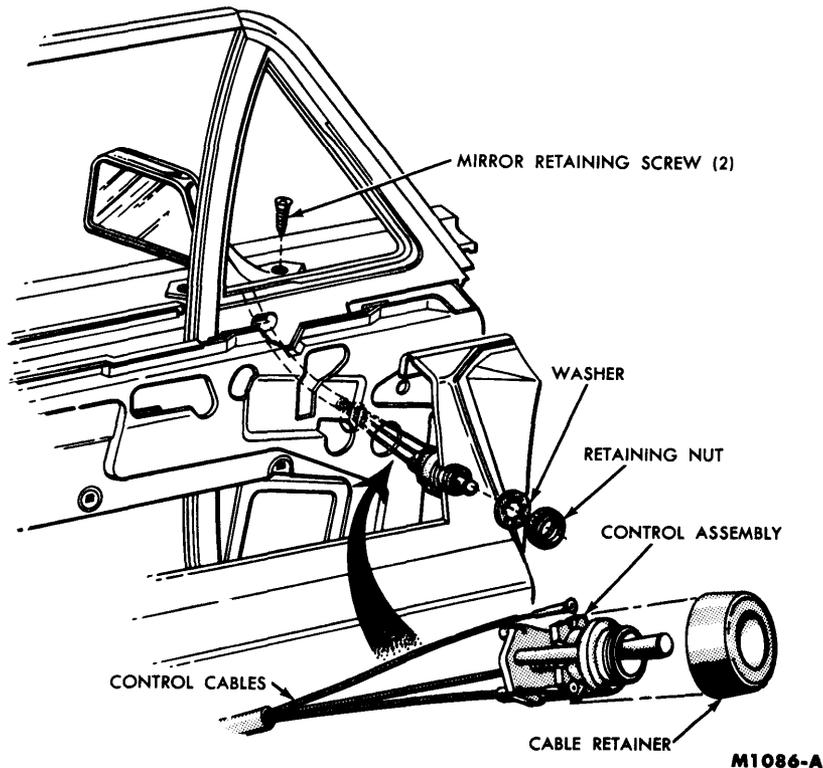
Exterior Remote Control Rear View Mirror—Typical
